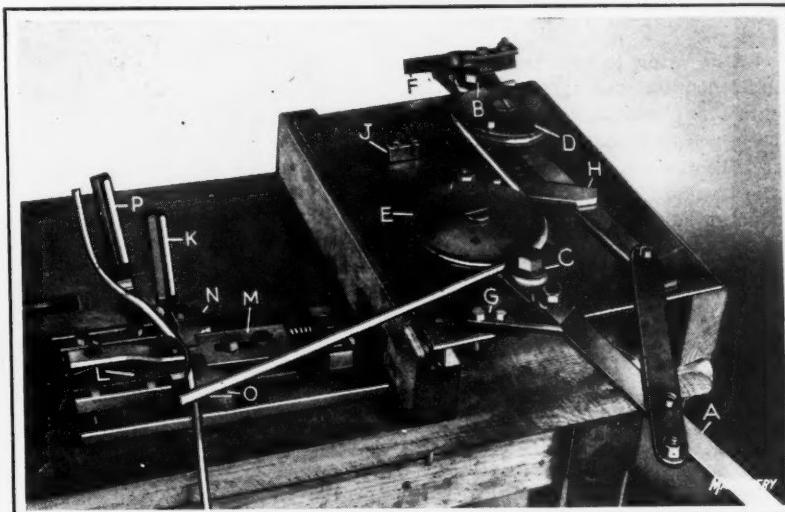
Two Fixtures which employ Different Principles for producing Four Bends in a Tube
